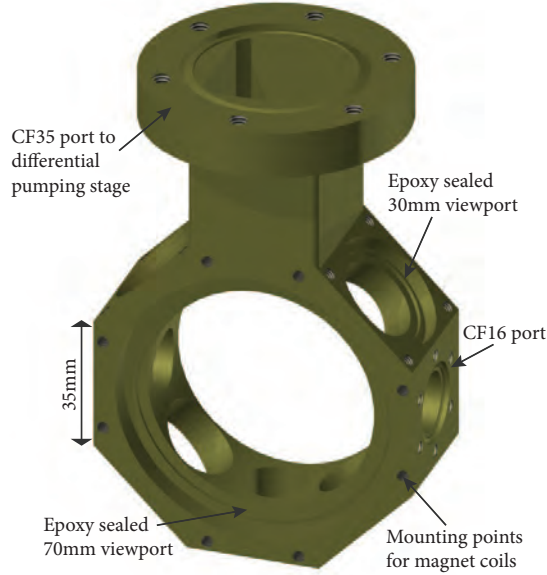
showing the CAD drawing of the 3D MOT chamber. The thickness of the chamber below the flange is 36mm, with an overall height of 129mm.
